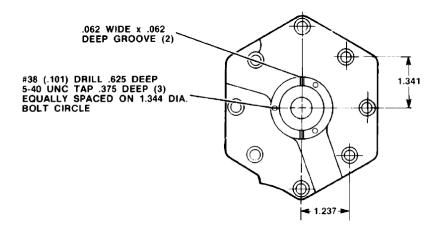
Dimensions for Machining 29 ft-lb Servo Cylinder for Weatherproof Boot
